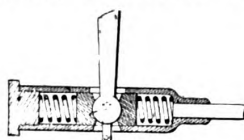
COMMON FORM OF BALL STEERING JOINT.
